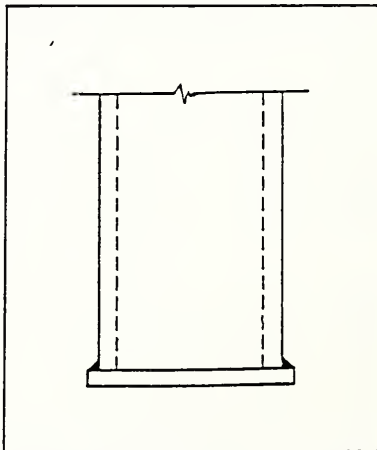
Thin steel shell with flat plate butt-welded at toe
